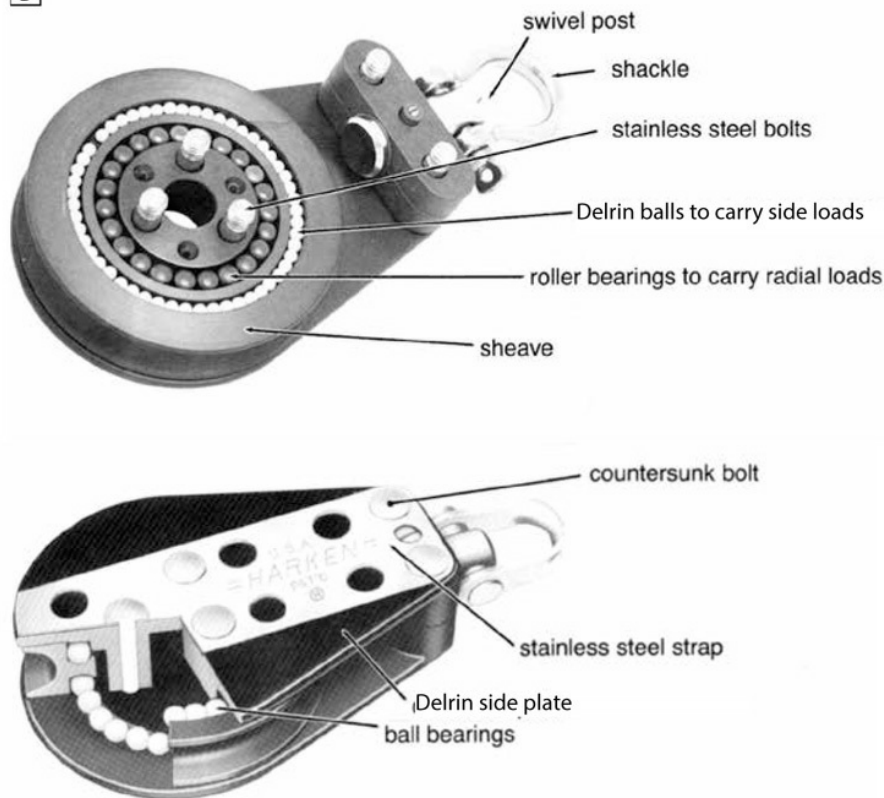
B. Bearing-type block construction. Note: white ball bearings
